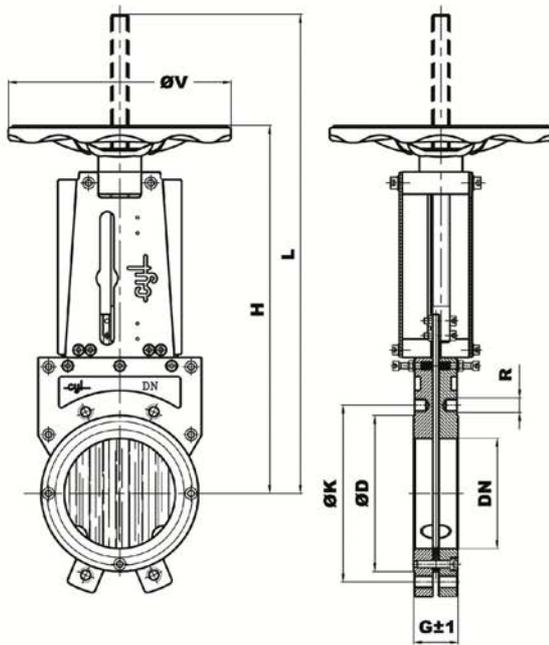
KGV-XD semi lugged rising stem with handwheel & gearbox
